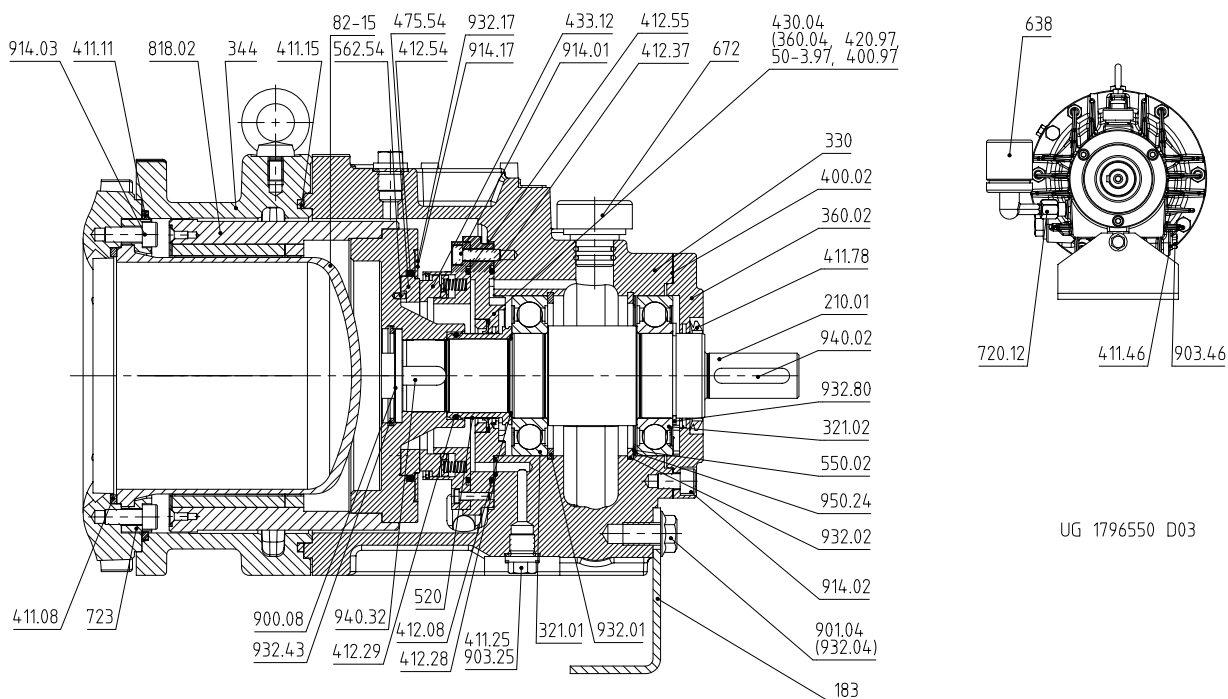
Model with bearing bracket with oil lubrication and gas-lubricated mechanical seal as leakage barrier
